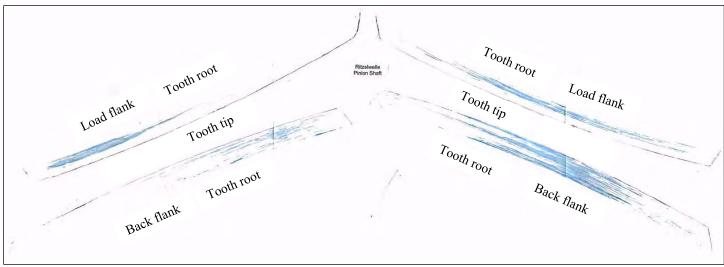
Result of the tooth contact check (blue ink check) at the gear manufacturer's shop
